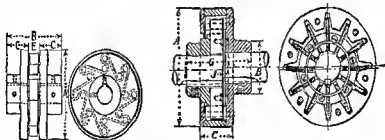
Belt-type Coupling. FIG. 73.—Flexible Steel Member Coupling.
